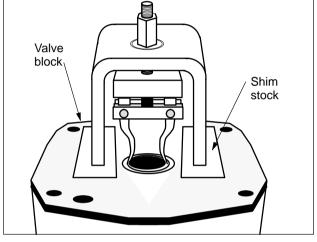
Valve Block Bearing Race Removal Tool w/shim stock
